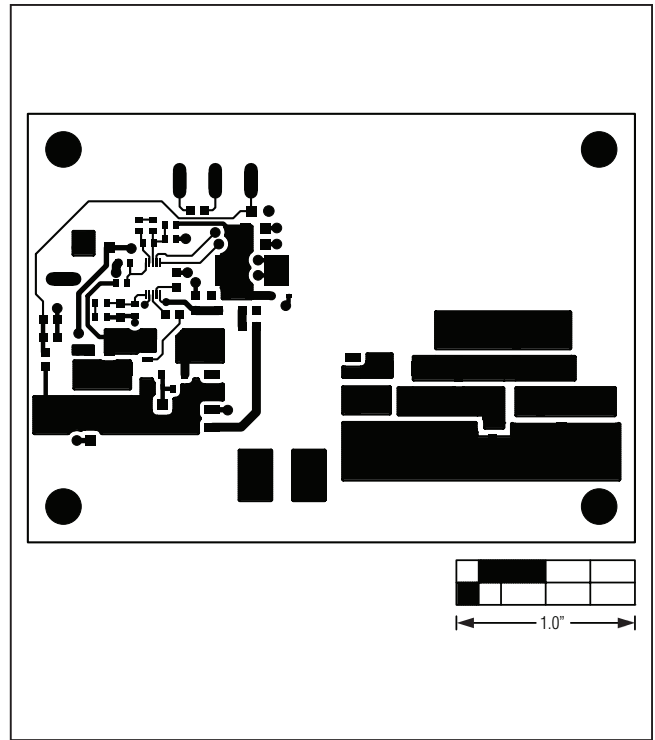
MAX17500A EV Kit PCB Layout—Component Side
